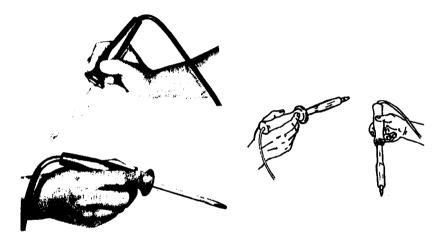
Pencil Grip Method of Holding Soldering Iron
